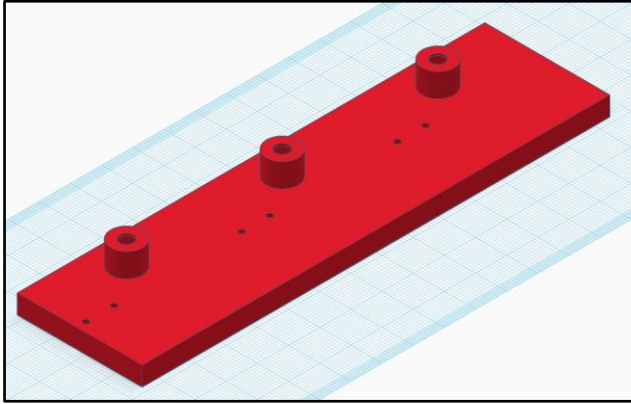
3D-Printed Laser Mount (3/4 view)
